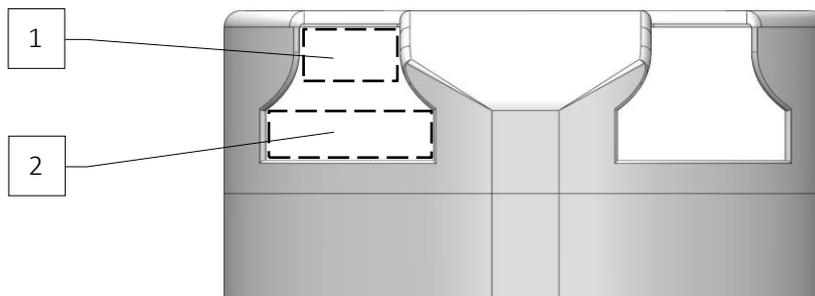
Profile of the holes for grabbers. 1 – Upper, smaller part of the hole for the forks; 2 – lower, bigger part of the hole.
